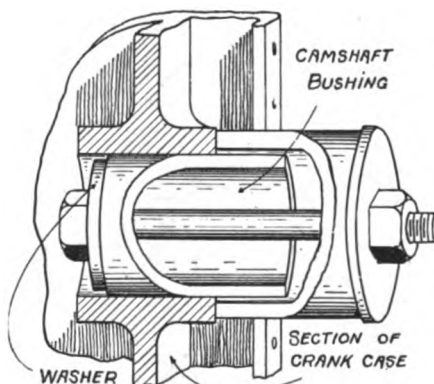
WITHDRAWING A CAM SHAFT BUSHING
